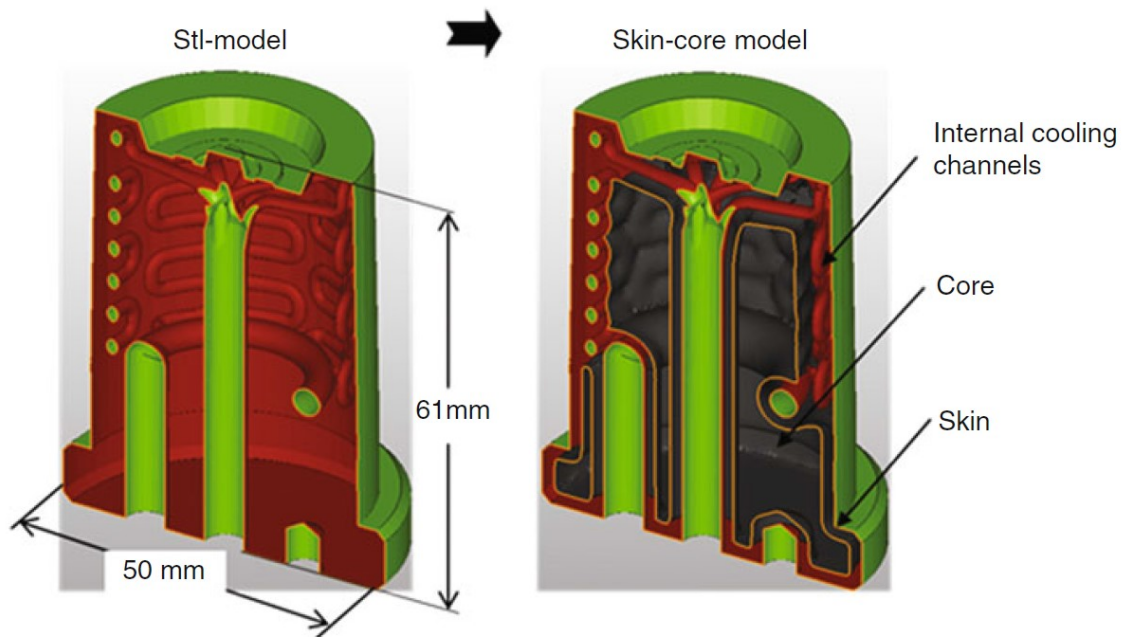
IM insert with conformal cooling, with skin-core manufacturing strategy for SLM manufacturing. (Buschbinder, et al., 2012)
